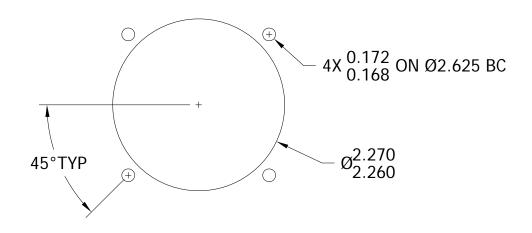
PANEL CUTOUT DIMENSIONS
